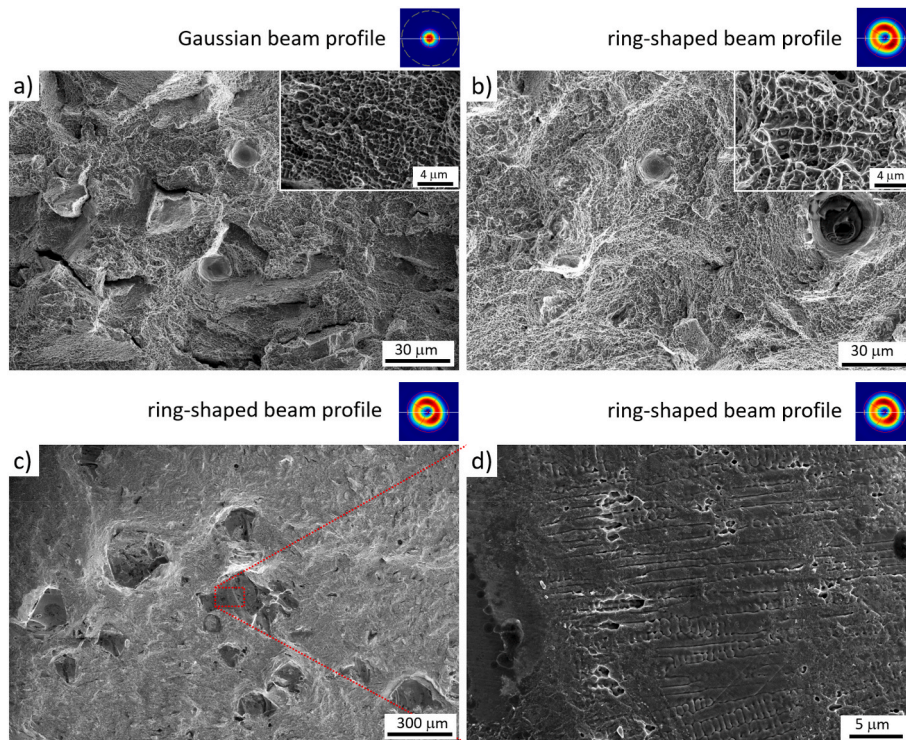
Fracture surface images obtained by the SE detector, a) Fracture surface of the tensile test sample produced with a) Gaussian and b) ring-shaped beam profiles, with an enlarged detail in the upper right corner showing dendrite size, c) lower magnification of the fracture surface of the tensile test sample produced with ring-shaped beam profile, showing a pore cluster, and d) detail showing the dendritic surface in the pore.
